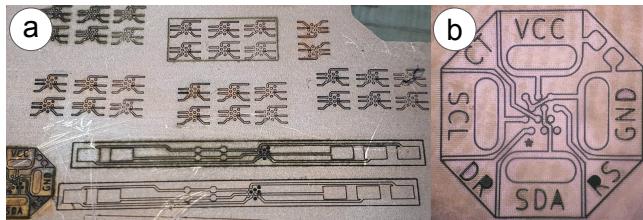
Lasing PCBs for quick prototyping, from 1st tests (a) to fully functional PCB ready to be assembled (b)
